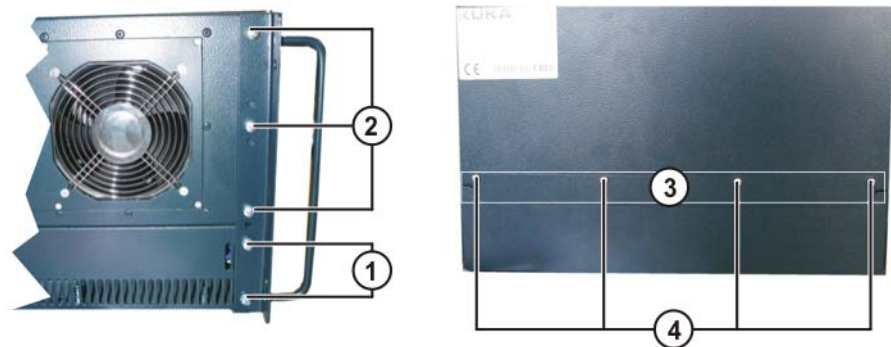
Fastening screws for handle brackets and connecting plate
